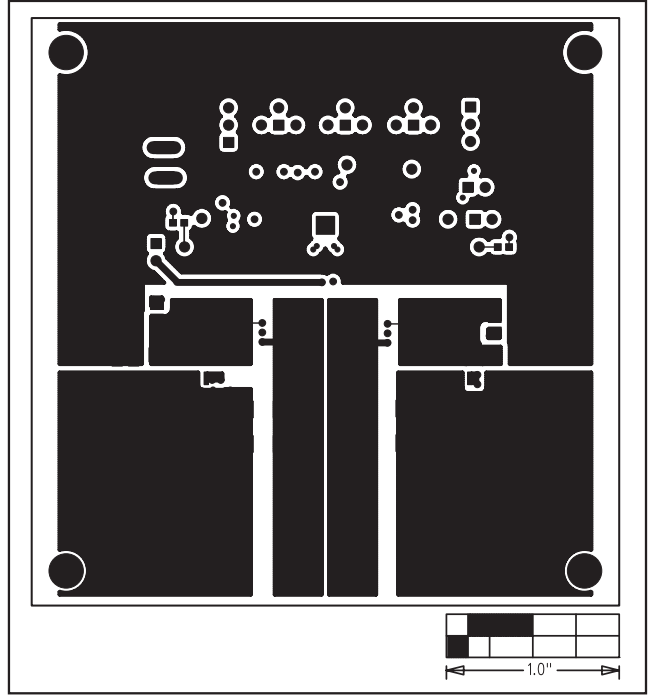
MAX17007 EV Kit PCB Layout—Component Side
